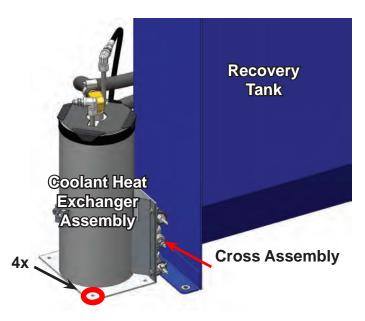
Installing Coolant Heat Exchanger/Cross Assembly
